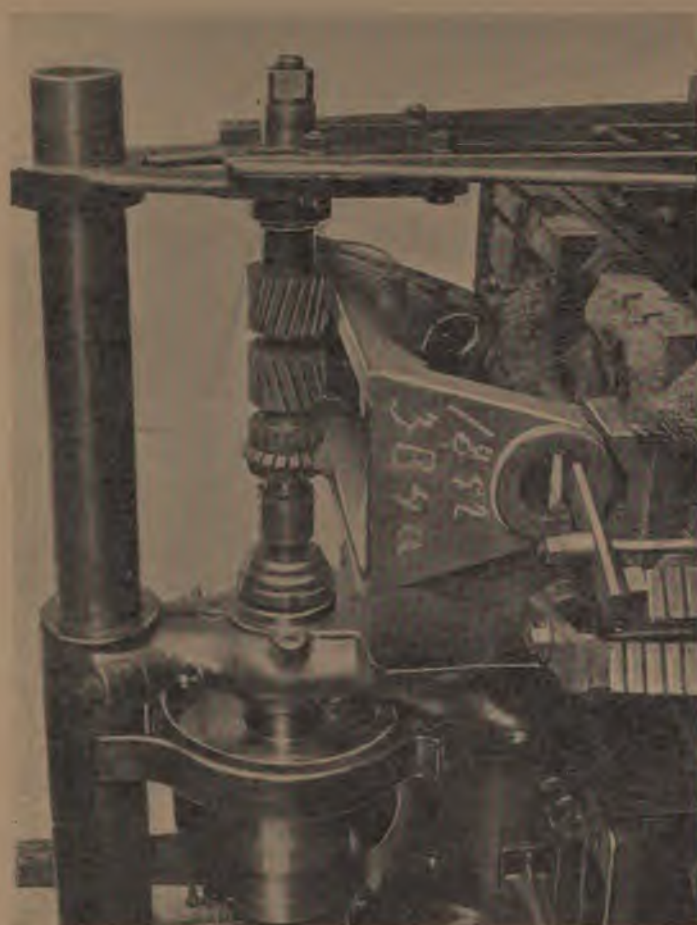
Milling Headstock Foot with a Gang of Cutters.
